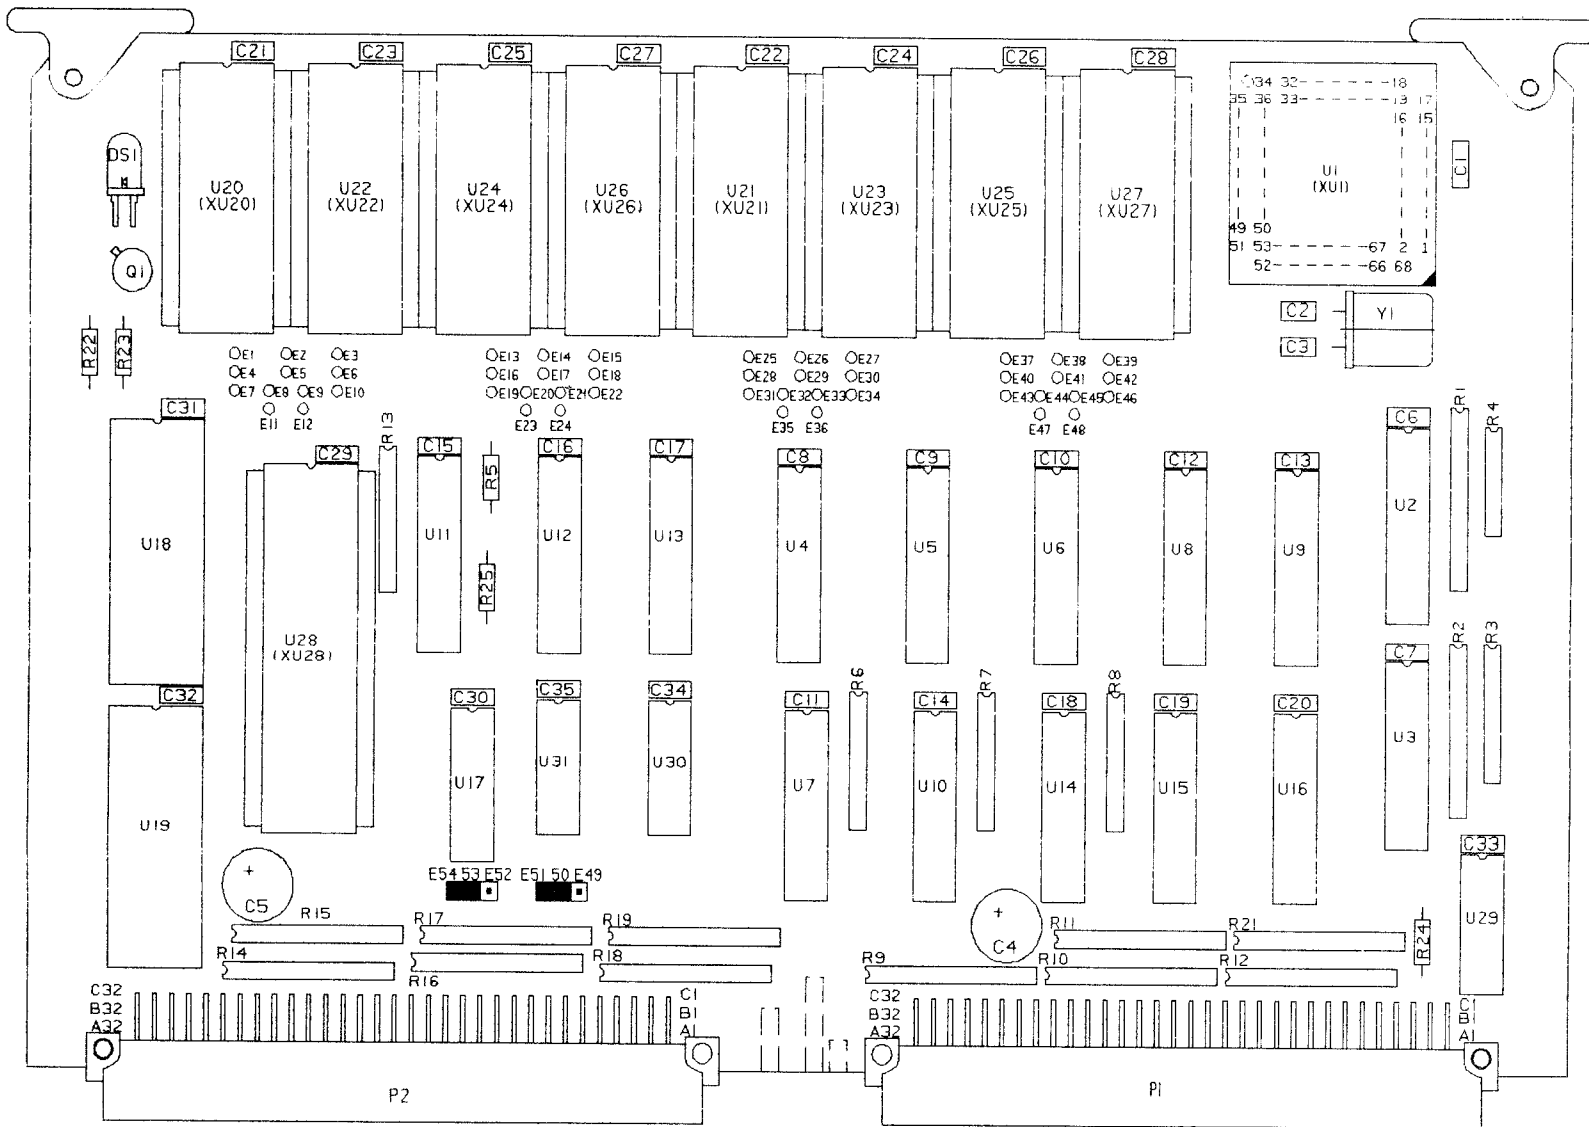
MOD/DEMOD A4 and FEC I/O PWB Assembly Component Locations (10133-2400-01/-02 Rev. G)
